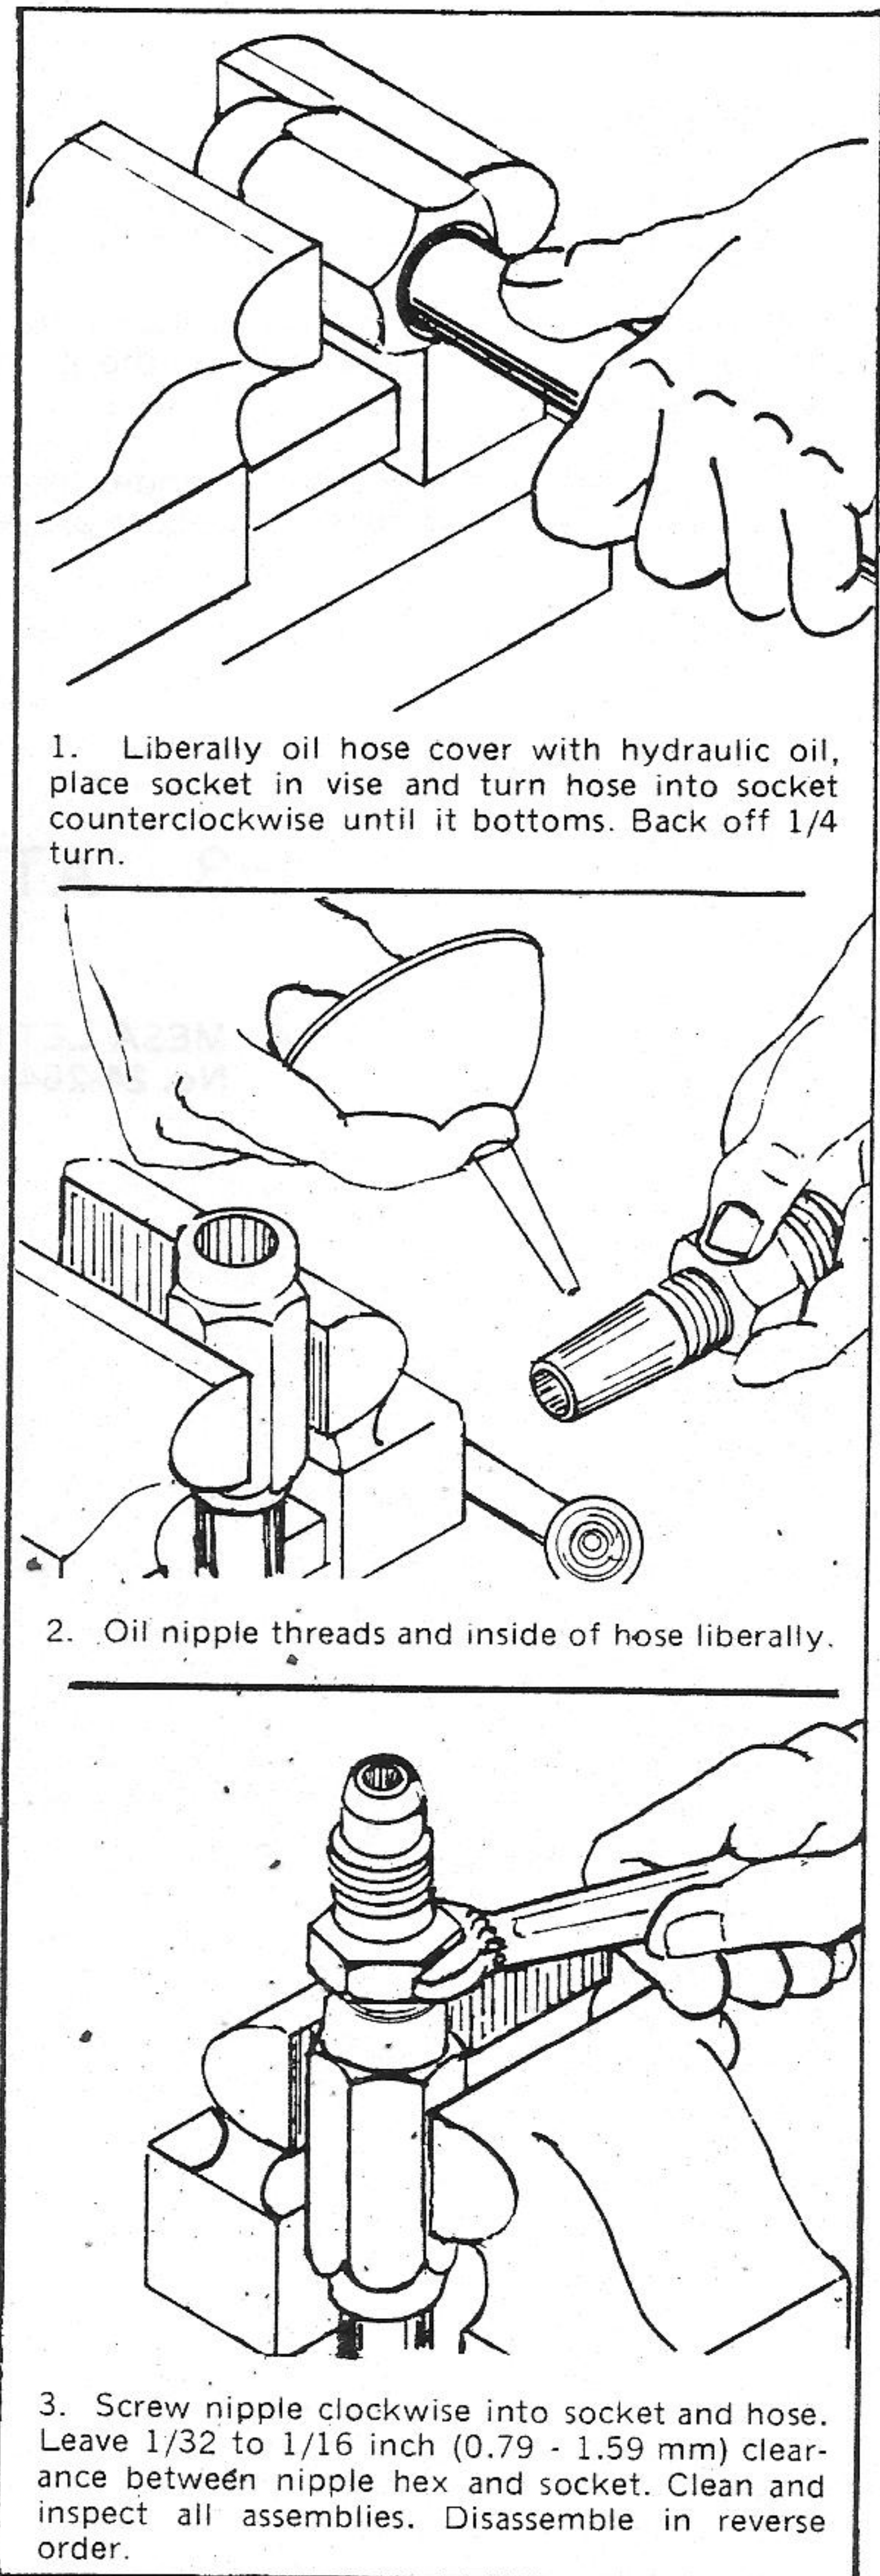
4. INSTALLING NEW HOSE FITTINGS
